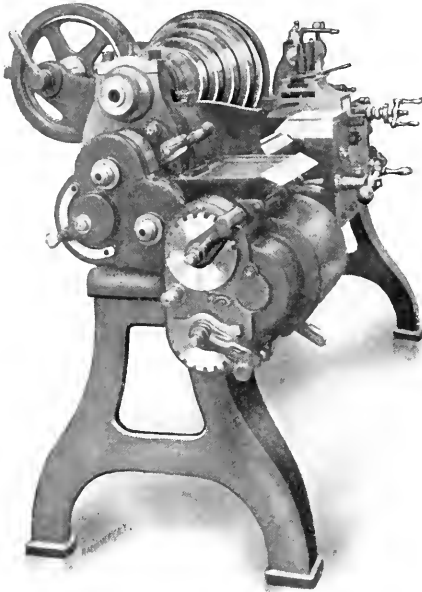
Reed Lathe Equipped with Burbank Change Gear Device.
